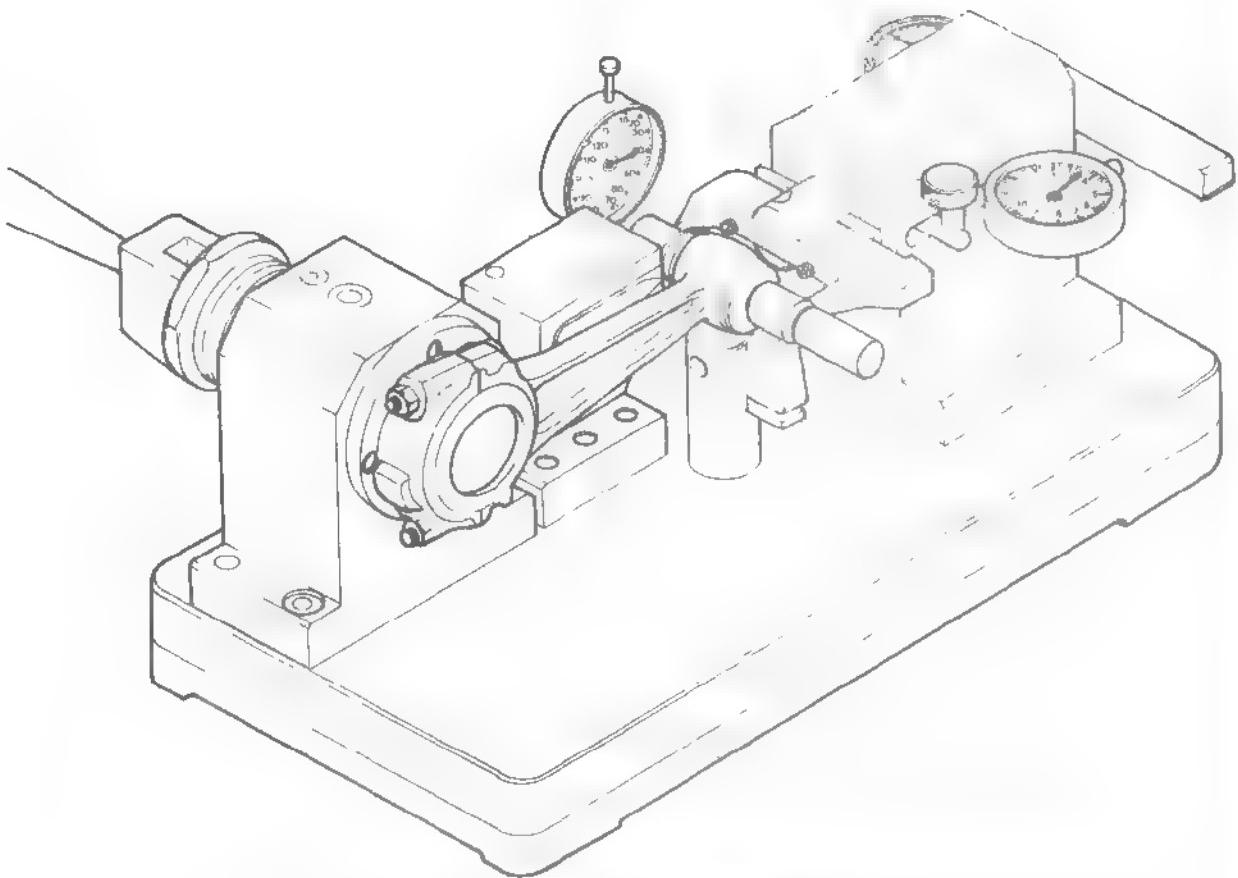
CHECKING TWIST, FLEXURE AND LENGTH OF PISTON ROD BY MEANS OF V-6 CHECKER.
